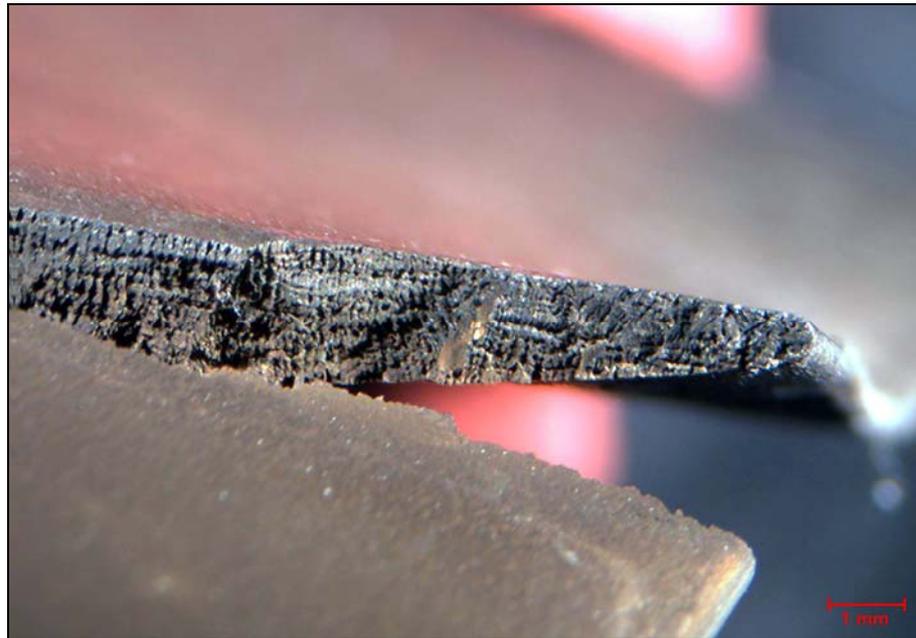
Blade C6406, trailing edge, close view on the fracture surface indicated in figure 8. Dendritic outlines clearly visible on the fracture surface indicate intergranular fracture. Combustion products and only very light oxidation are also evident.
